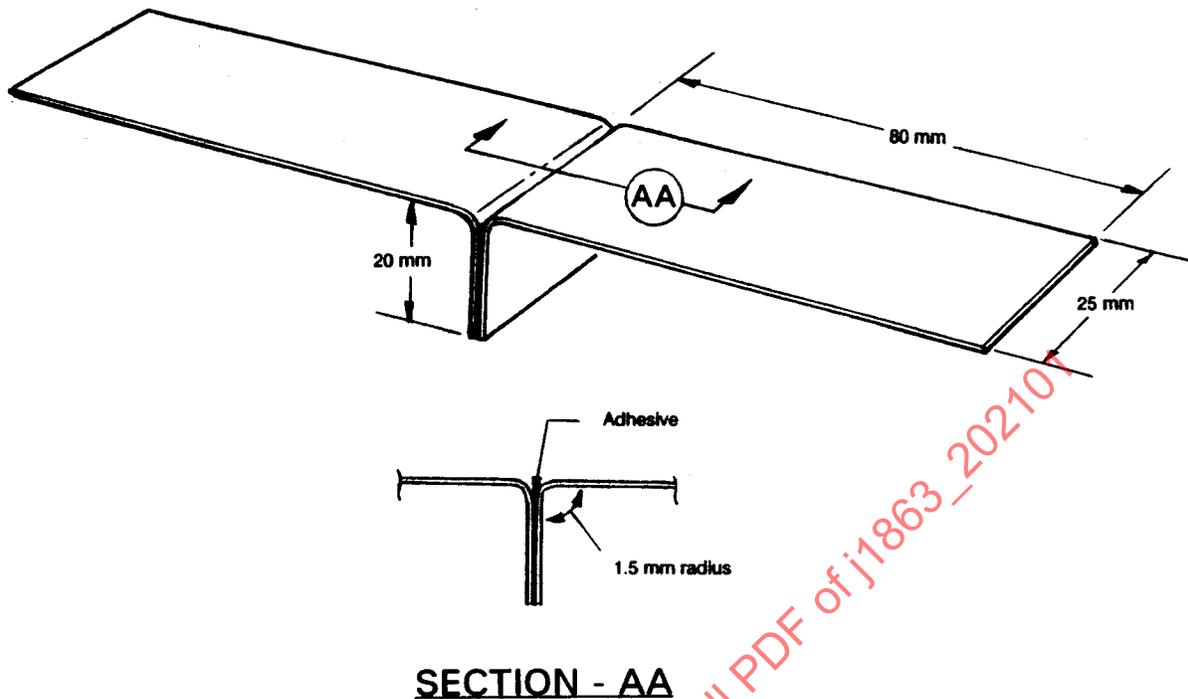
COACH JOINT FRACTURE SPECIMEN
